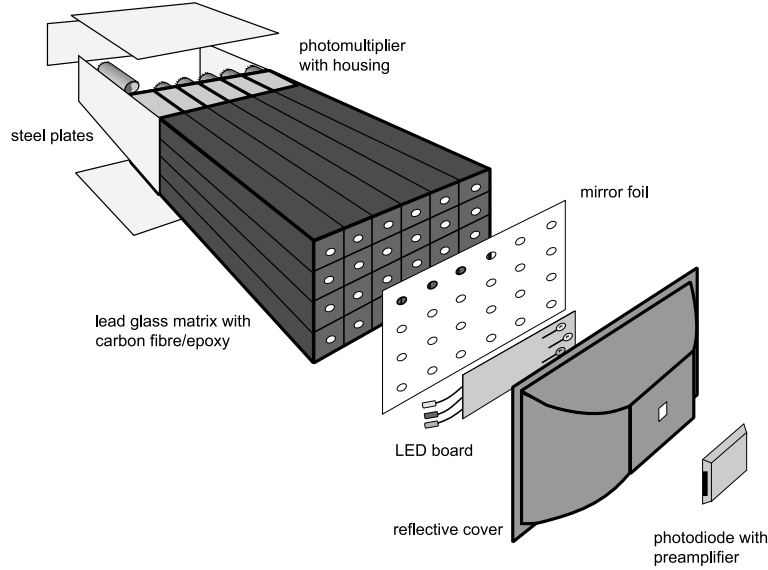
Exploded view of a lead glass calorimeter supermodule.
